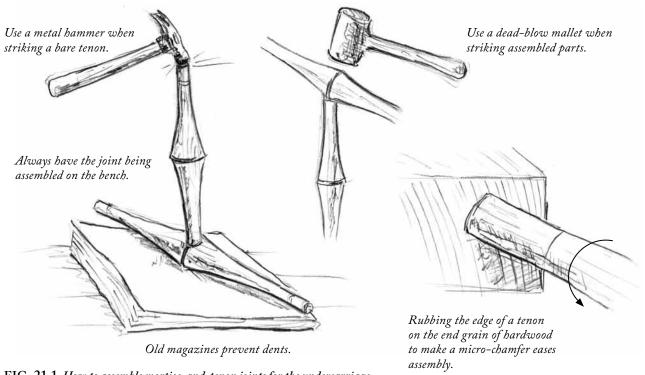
How to assemble mortise-and-tenon joints for the undercarriage.
